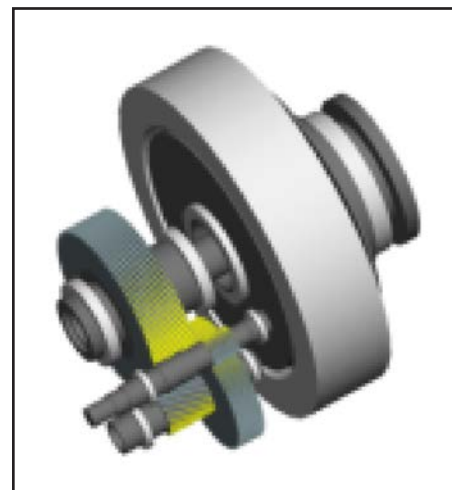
Principle design of a main gearbox for a 2 MW wind turbine (Ref. 2).
